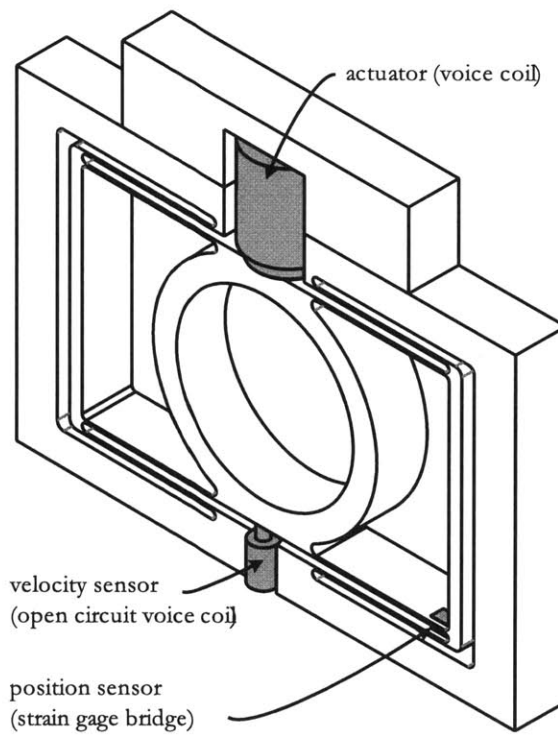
Actuator and sensor placement on each flexural bearing.
